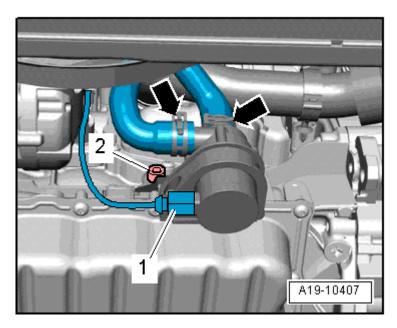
After-Run Coolant Pump V51 Bracket Bolt Courtesy of AUDI OF AMERICA, LLC
